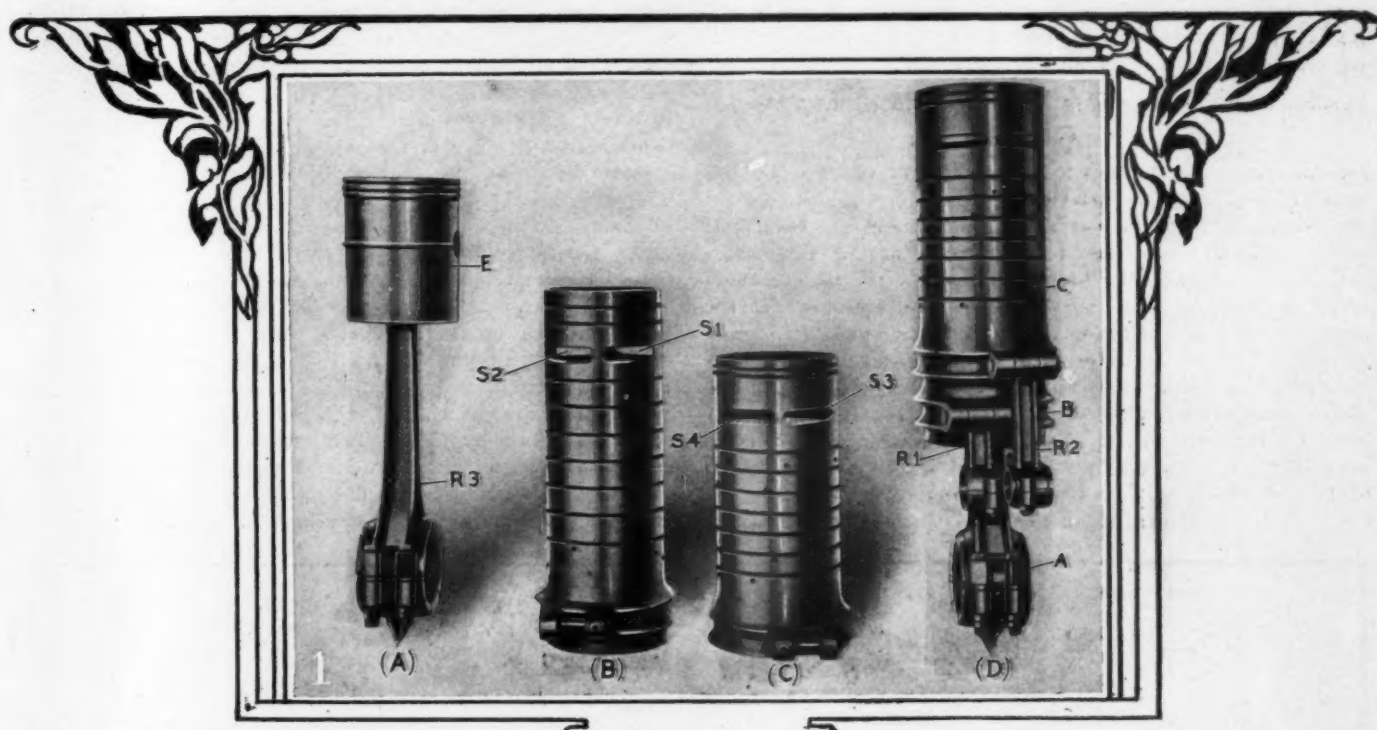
Presenting the connecting rod assembly of the sleeve type of motor, also the connecting rod with its piston in place, as well as the sleeves after they were taken out of a motor following 6,000 miles of tryout work
